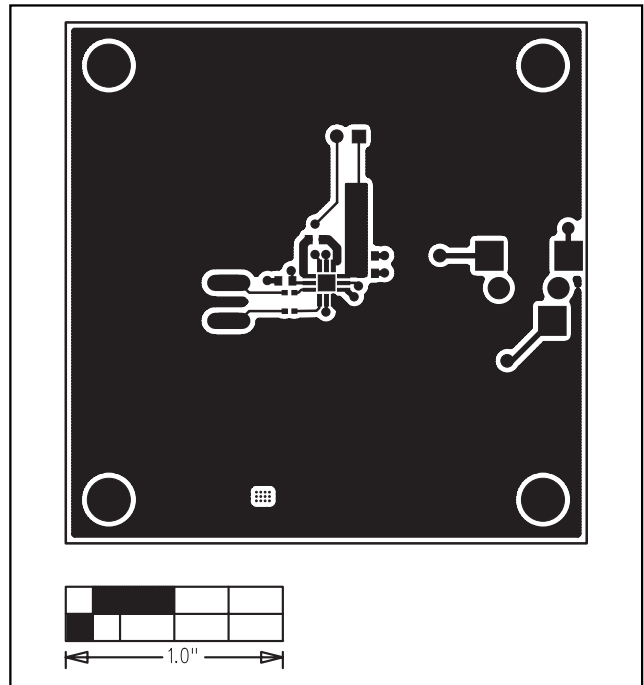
MAX9721 EV Kit PC Board Layout—Component Side
